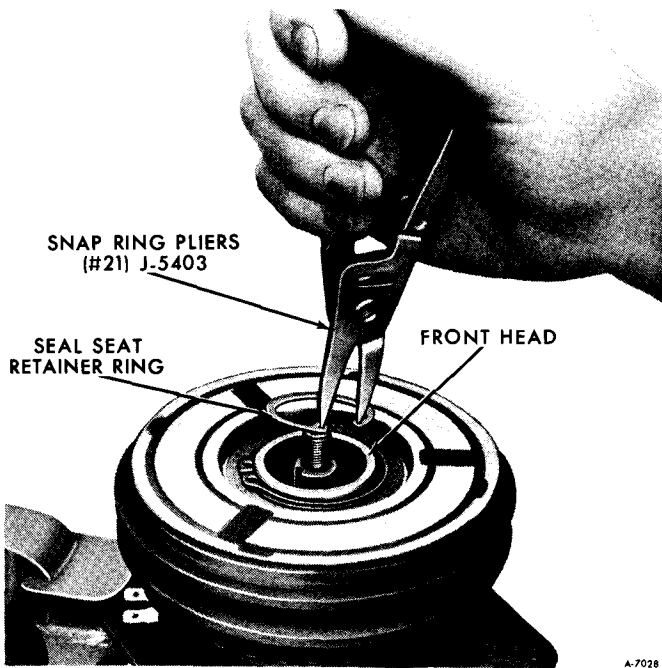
Replacing Shaft Seal Seat Retaining Ring
